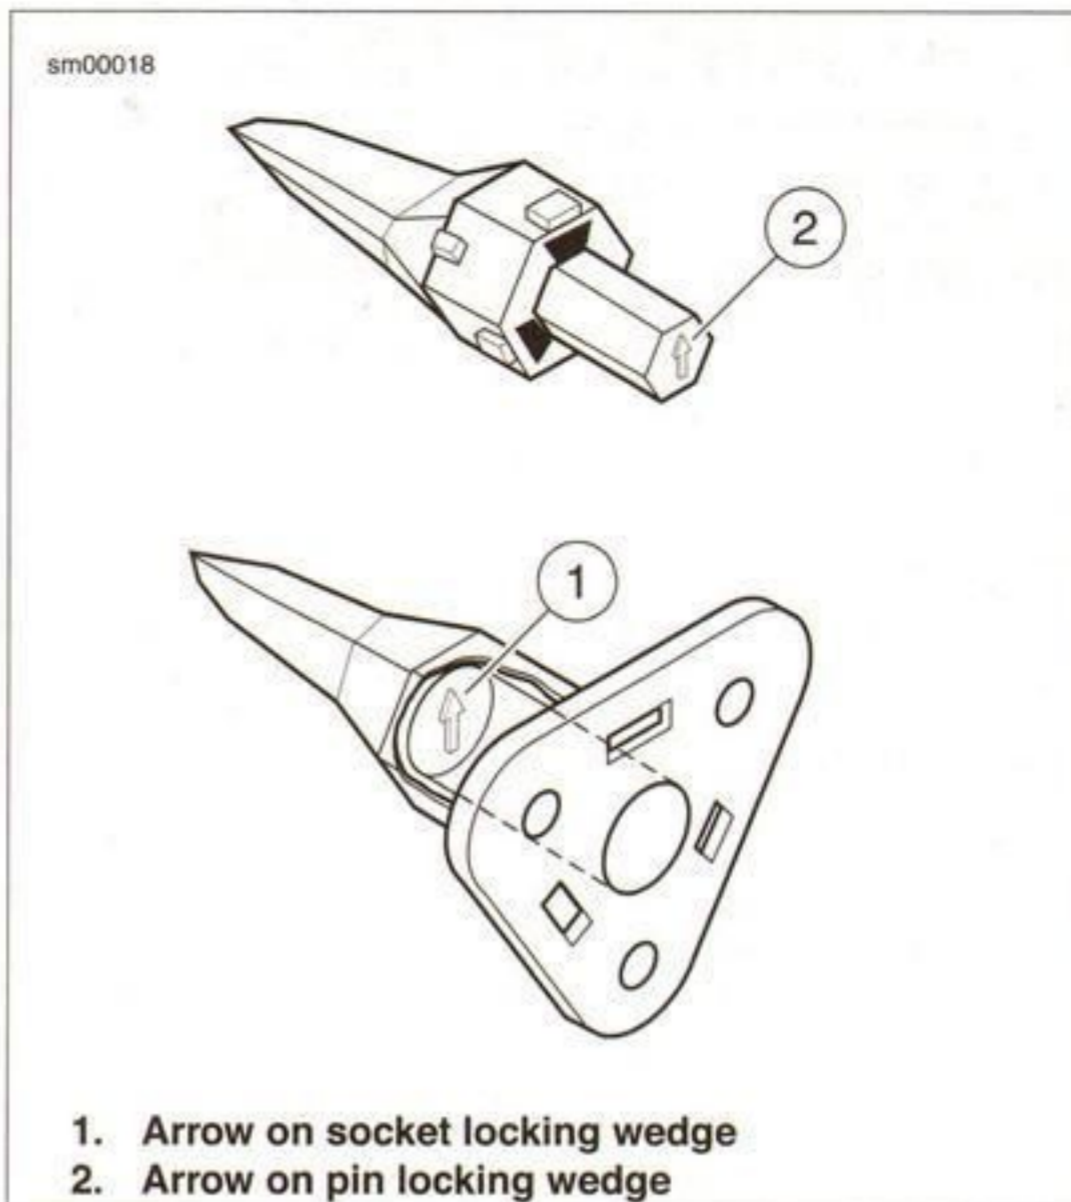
Deutsch Connector: 3-Place Locking Wedges
